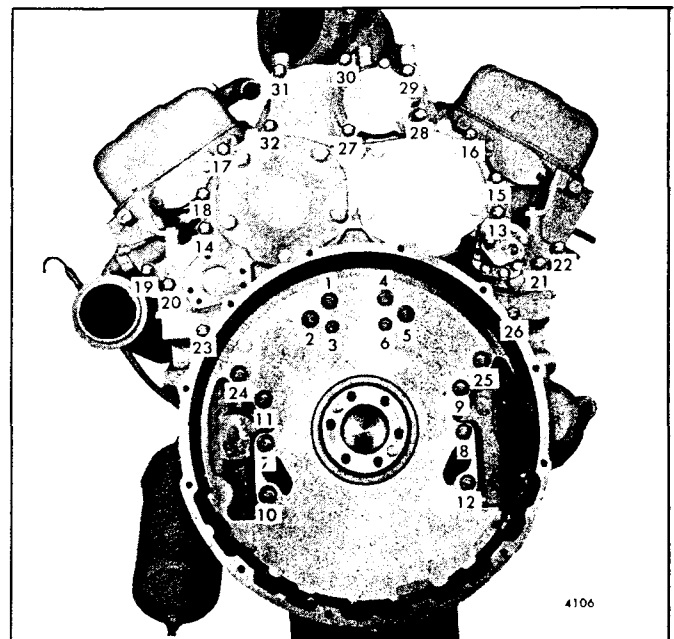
Flywheel Housing Bolt Tightening Sequence (Operation 1)-8V Engine
